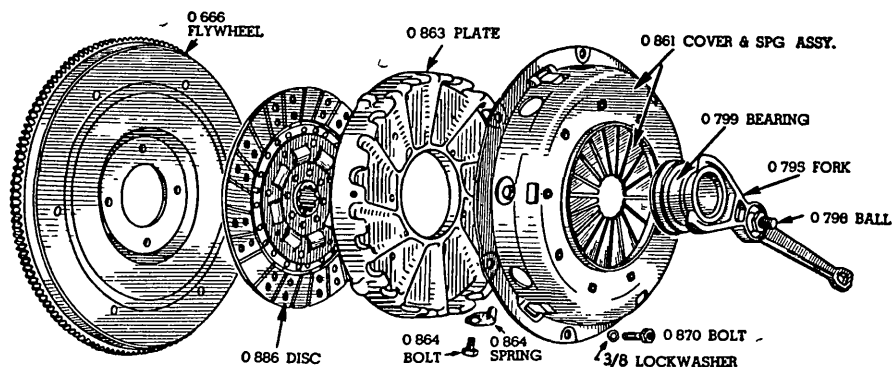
Inland diaphragm spring type clutch. Chevrolet 1939-51 sh wn
